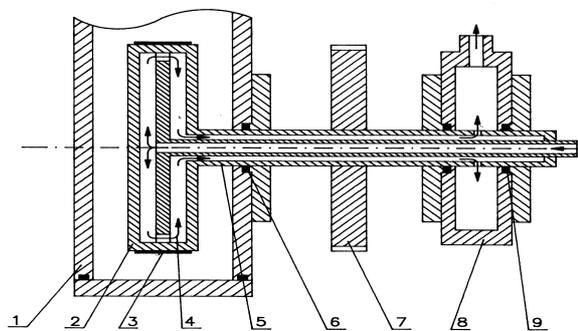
Schematic of the rotating drum with a cooling system. Notations: 1 – Vacuum chamber, 2 – Rotating drum, 3 – SSNTDs, 4 – Cooling flow, 5 – Driving shaft, 6 – Vacuum seal, 7 – Driven gear, 8 – Cooling block, 9 – Sliding contact packing.
